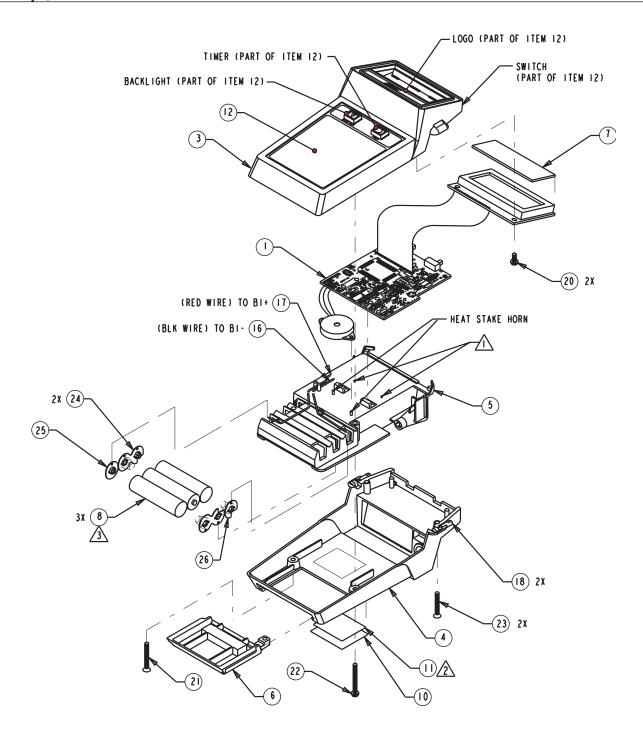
THERMOMETER ASSEMBLY DRAWING
